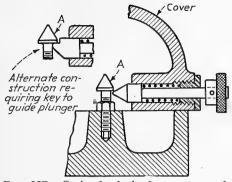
Spring-backed plunger type of automatic door lock, for light duty.
